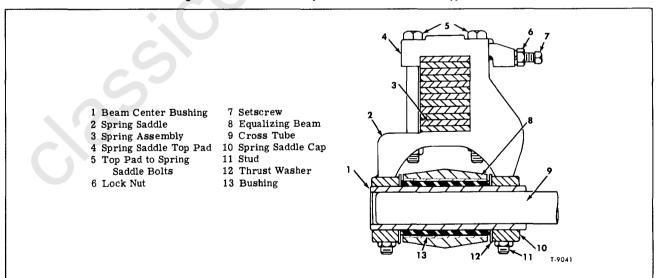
Section Through Spring, Saddle, and Beam (Hendrickson RT)
